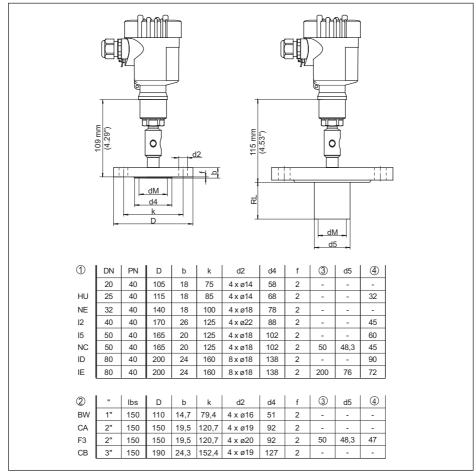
VEGABAR 81, flange connection, dimensions in mm
